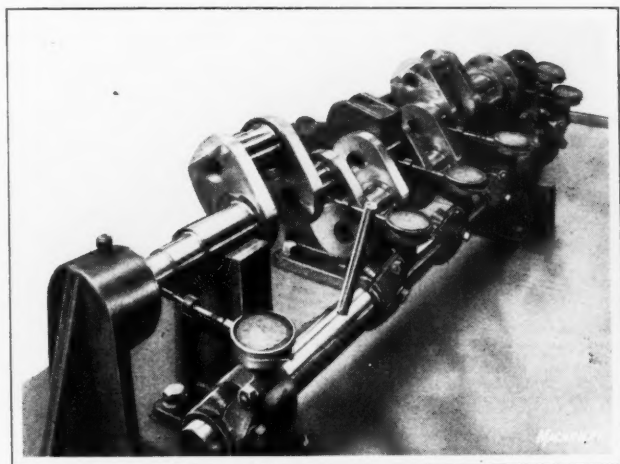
Fixture for determining the Concentricity of Six Cylindrical Surfaces and the Squareness of Two Faces
